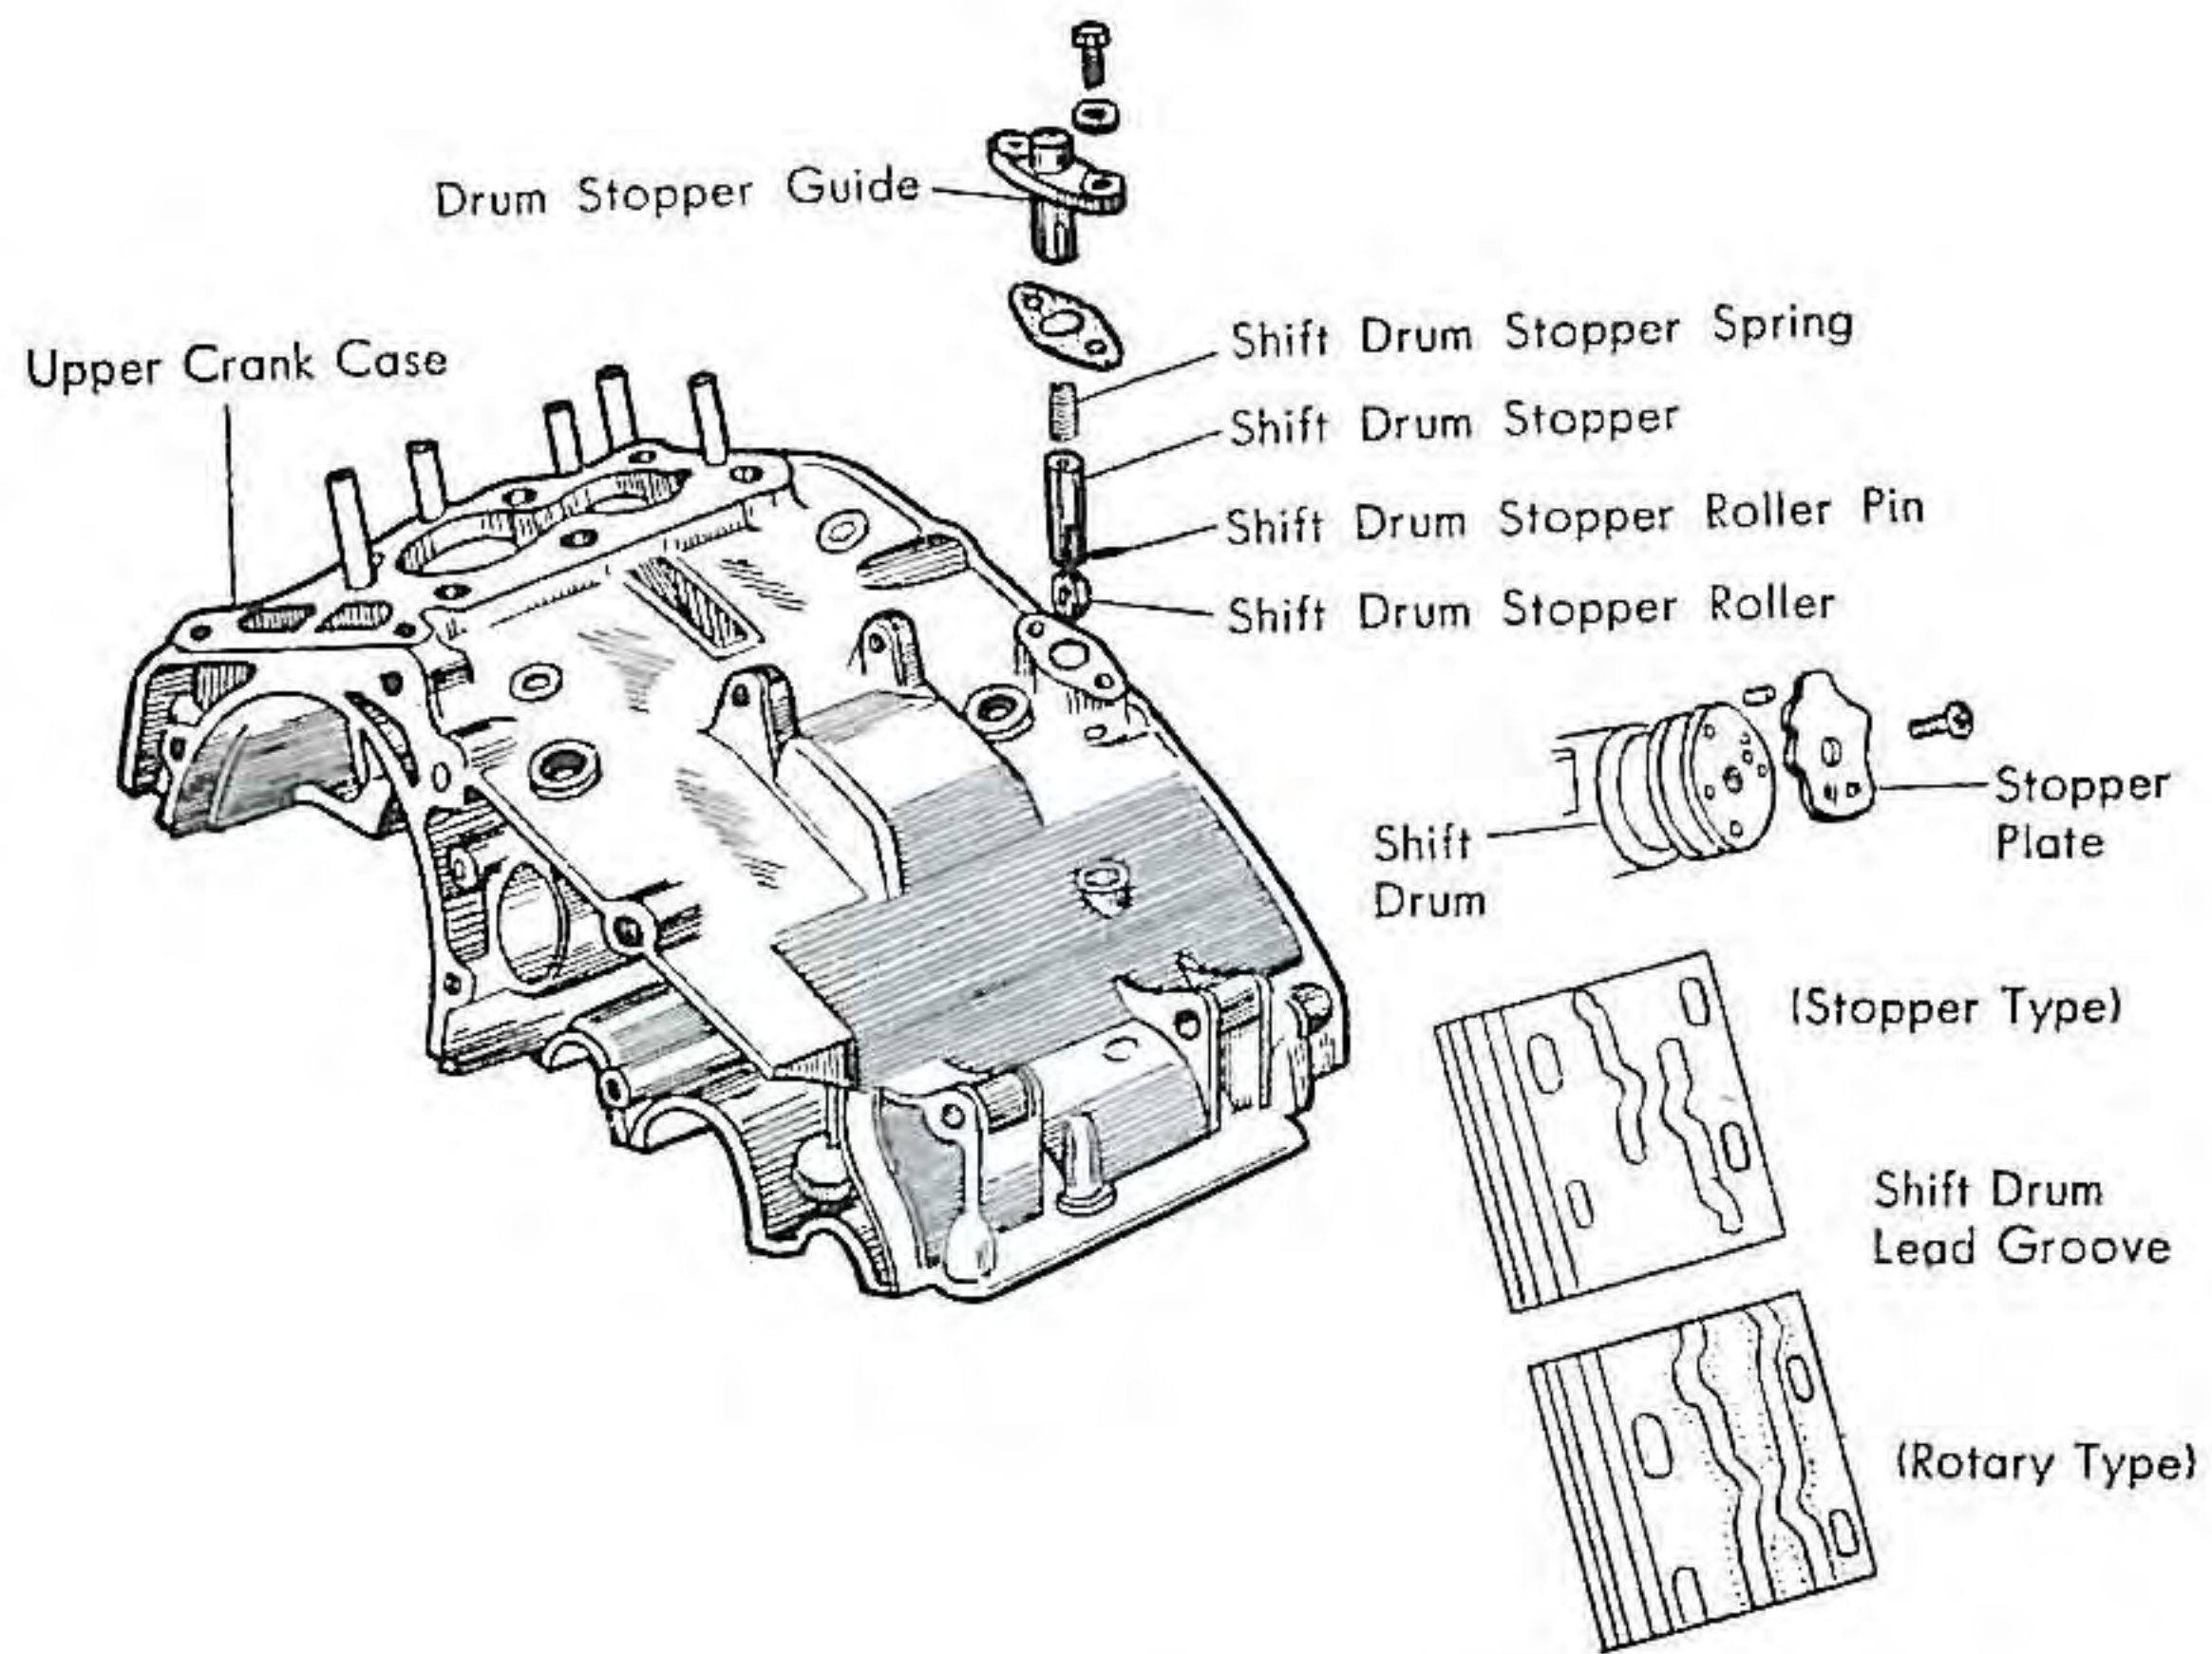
Removal of shift drum stopper roller (CB92 & CA95)
